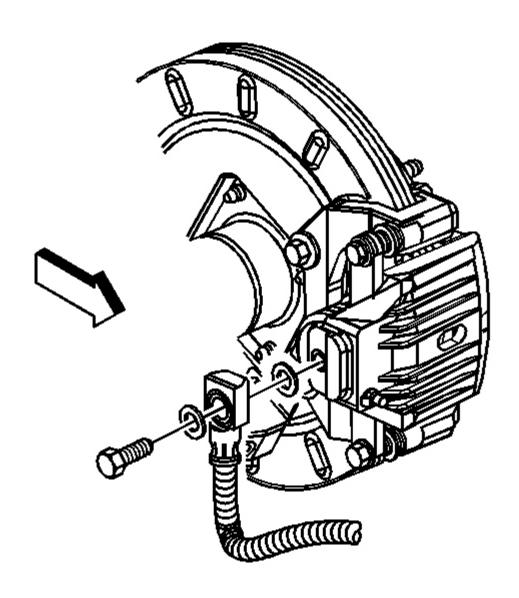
Brake Hose Bolt From Brake Caliper Courtesy of GENERAL MOTORS CORP.
